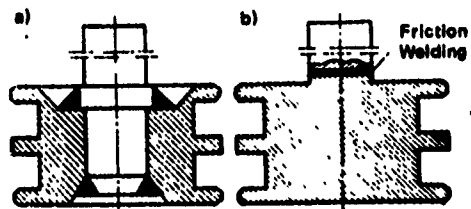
Production of piston with rod. a - old method; b - friction welding.
